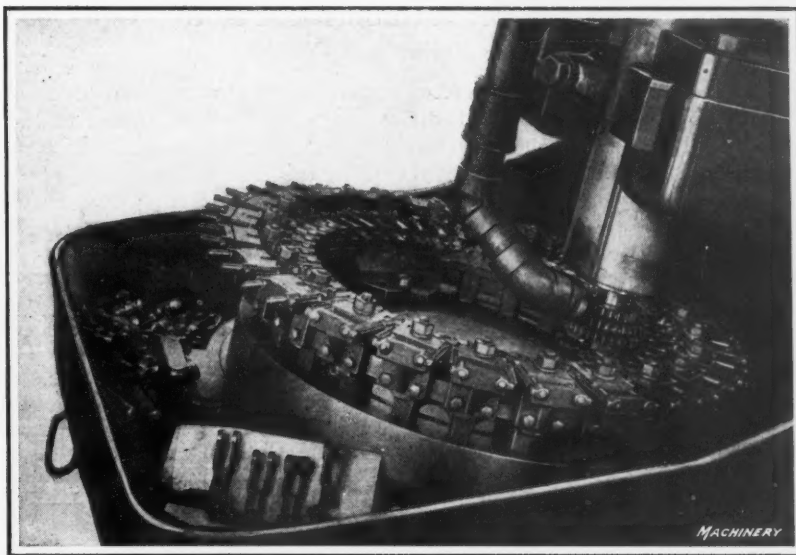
Continuous Milling Fixture for holding Forty-eight Brake Rod Clevises, and Method of applying Cutters to Work
